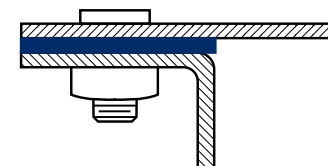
Insert Pressed-In and Flared Makes EMI Tight Joint (Alternate: Weld or Cement with Conductive Epoxy)
